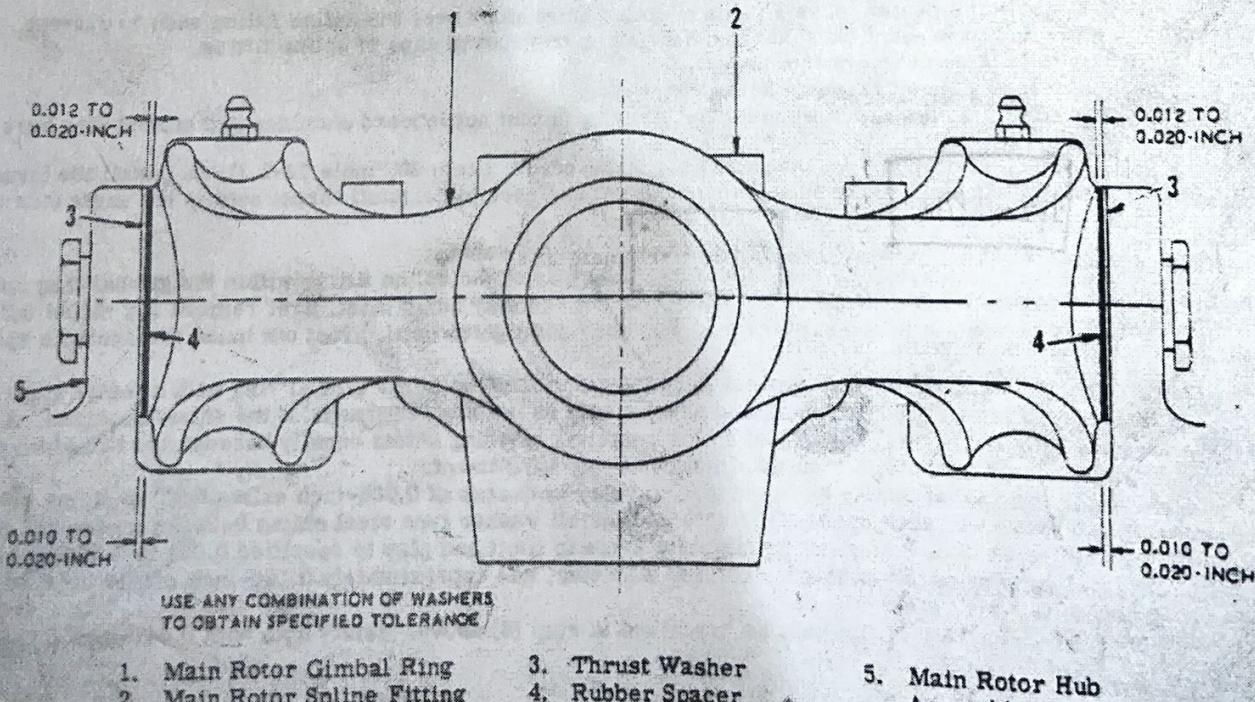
Main Rotor Head Gimbal Ring Clearance
